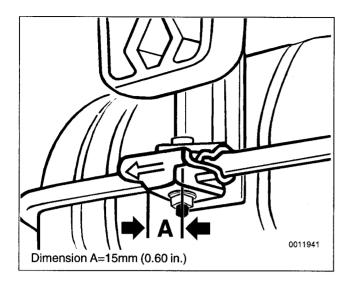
Preload rear clamping bracket as specified to help prevent system rattling.
